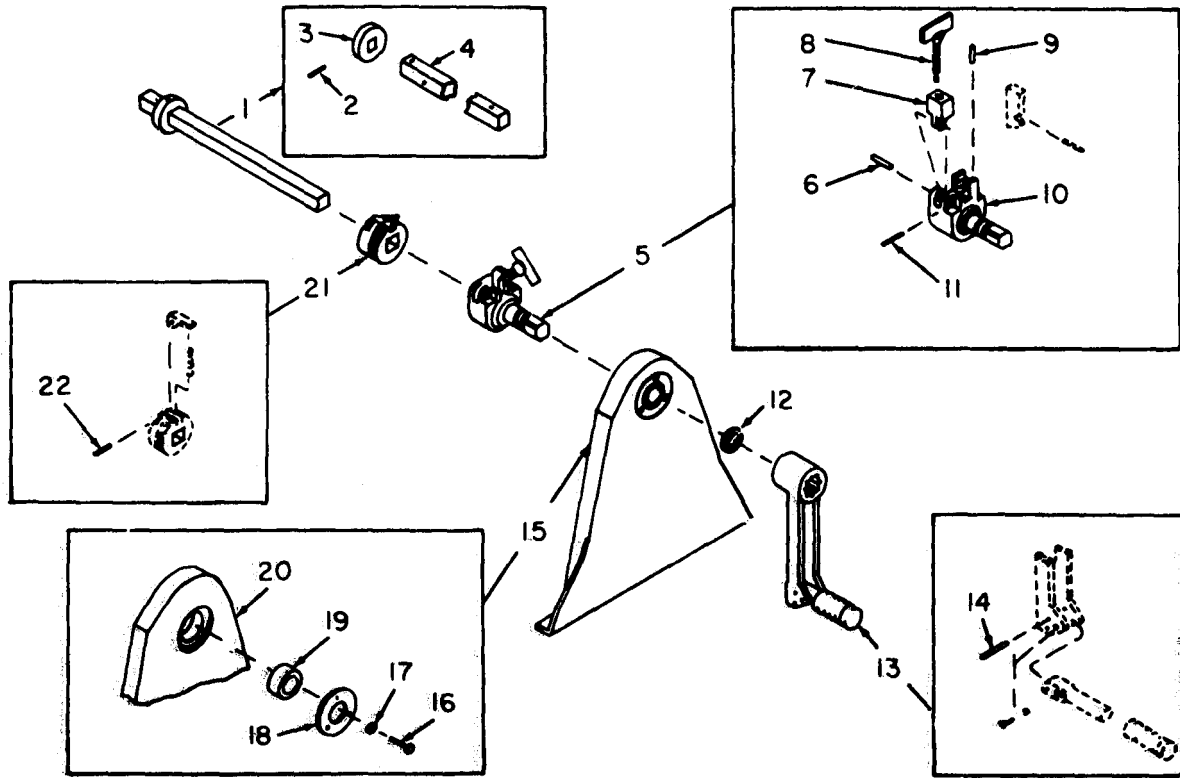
Reeling Machines, Cable, Motor Driven RL-172/G and RL-172A/G.
